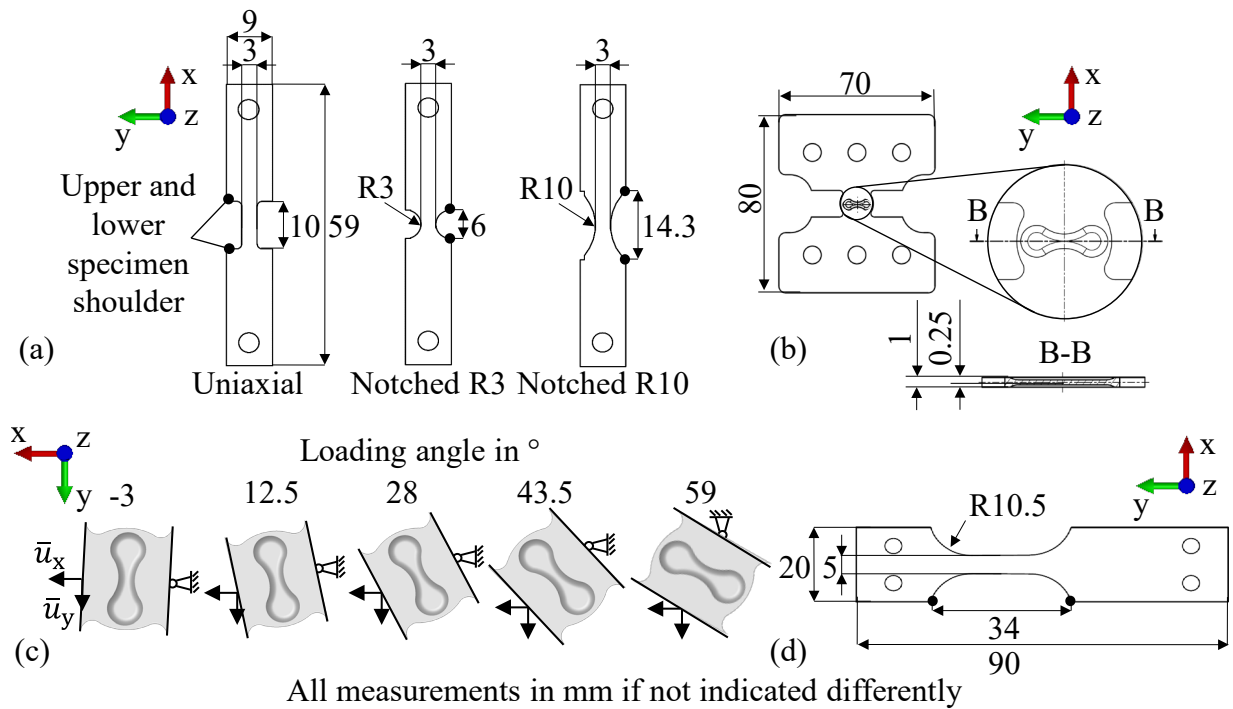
Miniaturised tensile specimens (a), butterfly specimen (b), loading angles of butterfly tensile tests (c) and high speed tensile specimen (d).
